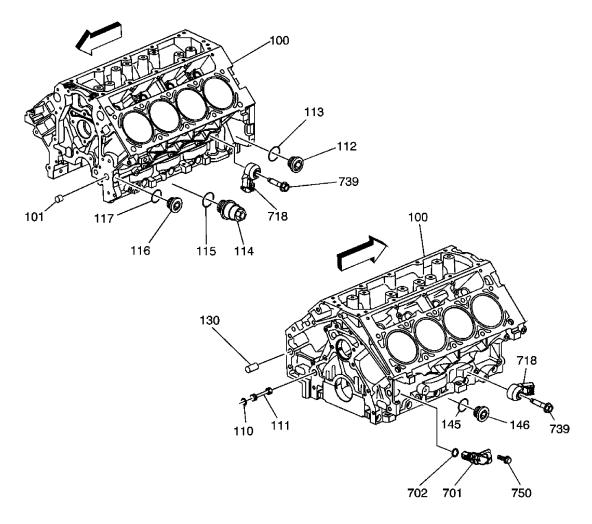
Exploded View Of Engine Block Plugs/Sensors Components Courtesy of GENERAL MOTORS CORP.
